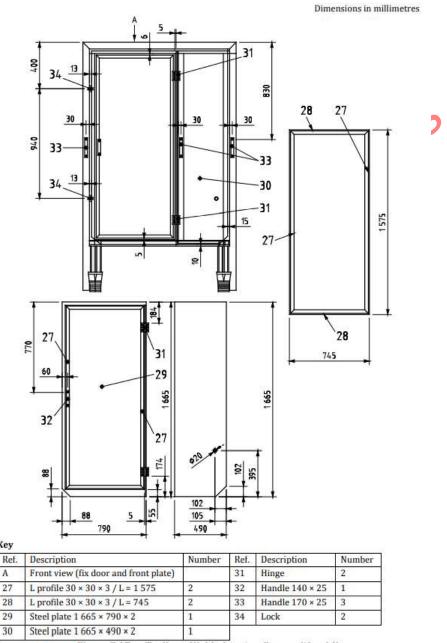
Trolley - Welded parts - Composition (d)
